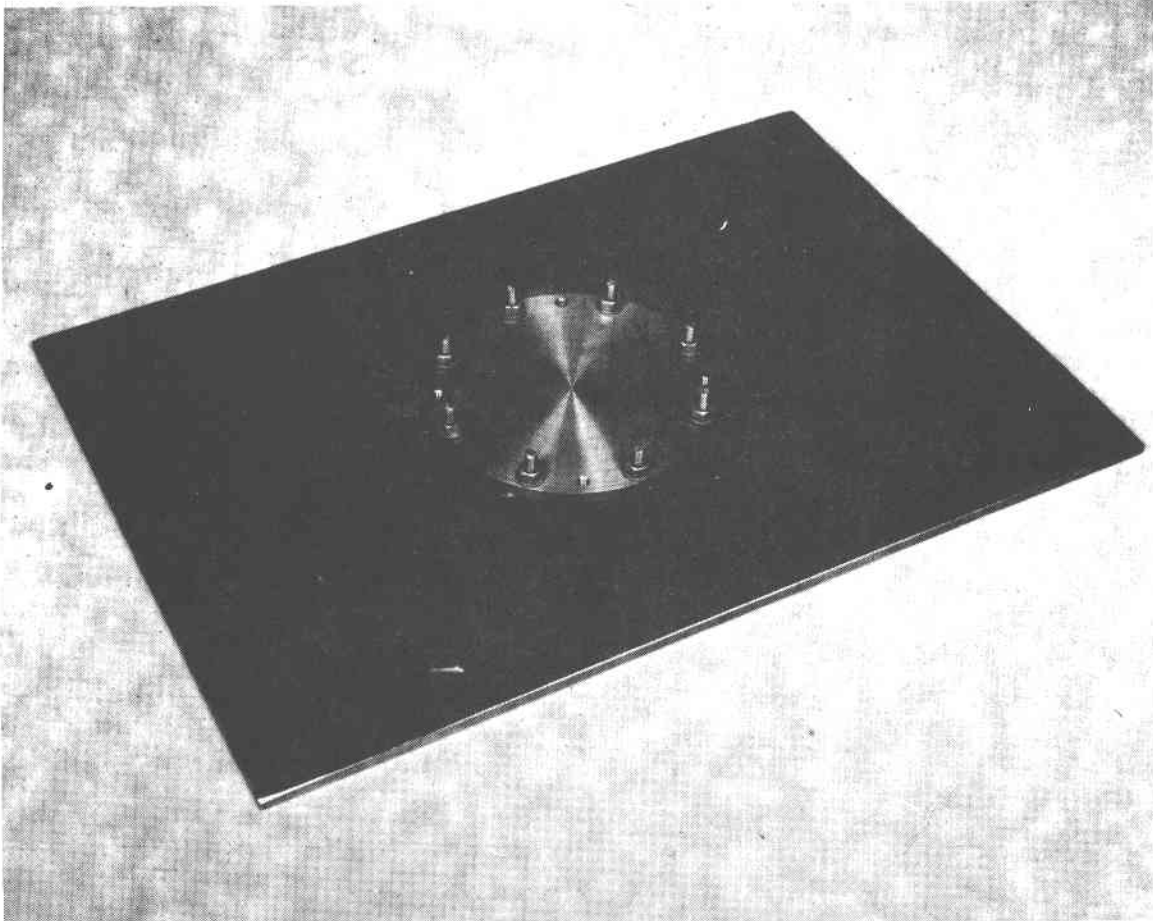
Flowby Module Cover with Viewing Port Flange
